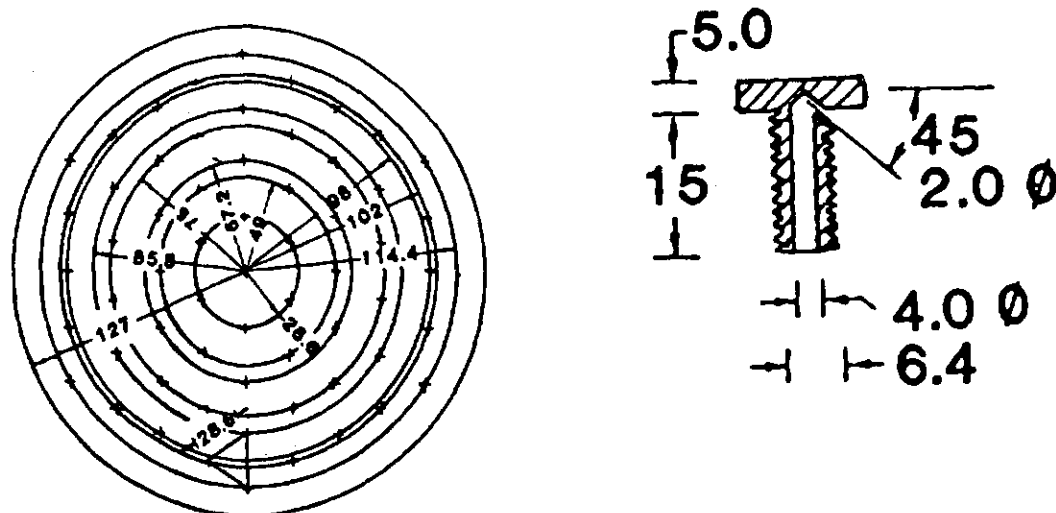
B. Arrangement of the bubble-caps on the distributor plate. All dimensions are in mm.
